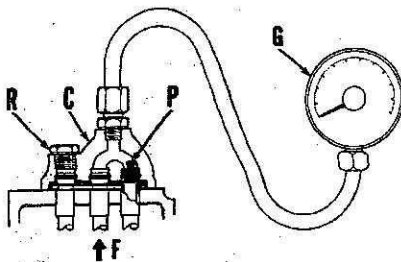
View showing installation of gage for checking hydraulic pump relief pressure on models 880, 770 and 4600. Axle cover plate (C) must be removed and a special plug (P) installed to block passage to control valve. Flow (F) is then closed except to gage (G). Return port (R) is for external hydraulic use.
